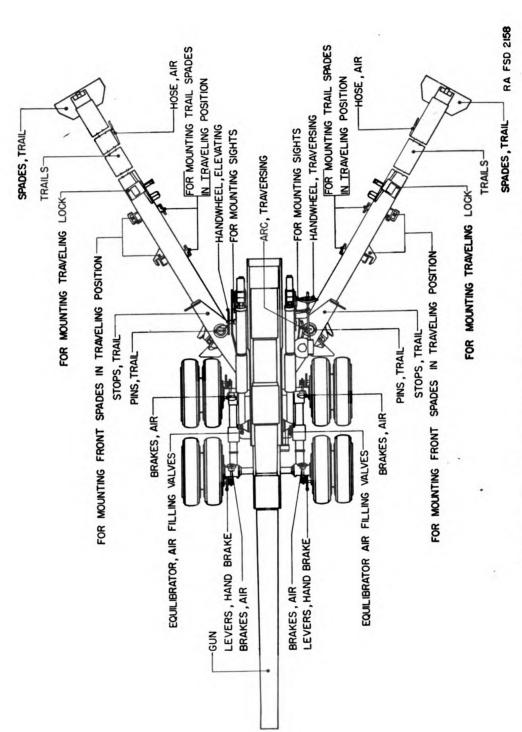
155-mm gun carriage M1-instruction plate, plan view.
